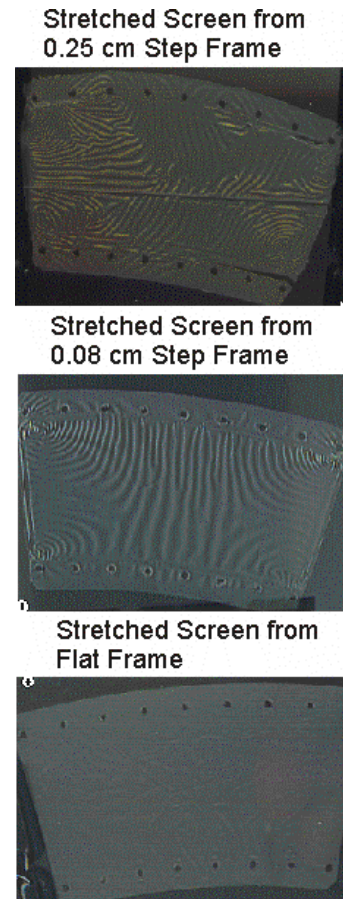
PHOTOGRAPHS OF SCREENS THAT WERE PREVIOUSLY STRETCHED ON DIFFERENT FRAME ASSEMBLIES, REMOVED FROM THE ASSEMBLIES, AND PRESSED FLAT.
